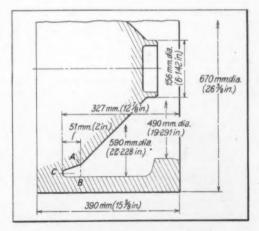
Sectional view of part of a piston head for a Doxford marine diesel engine showing the profile shape produced on the Denham lathe. The work is held in a 36-in. 4-jaw chuck
